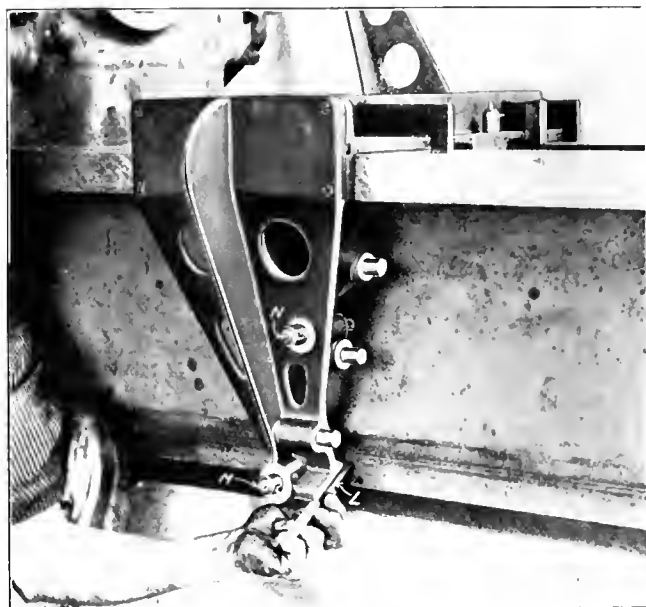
Testing the Bevel Bearing Surface for the Cross-slide Carriage Support.
